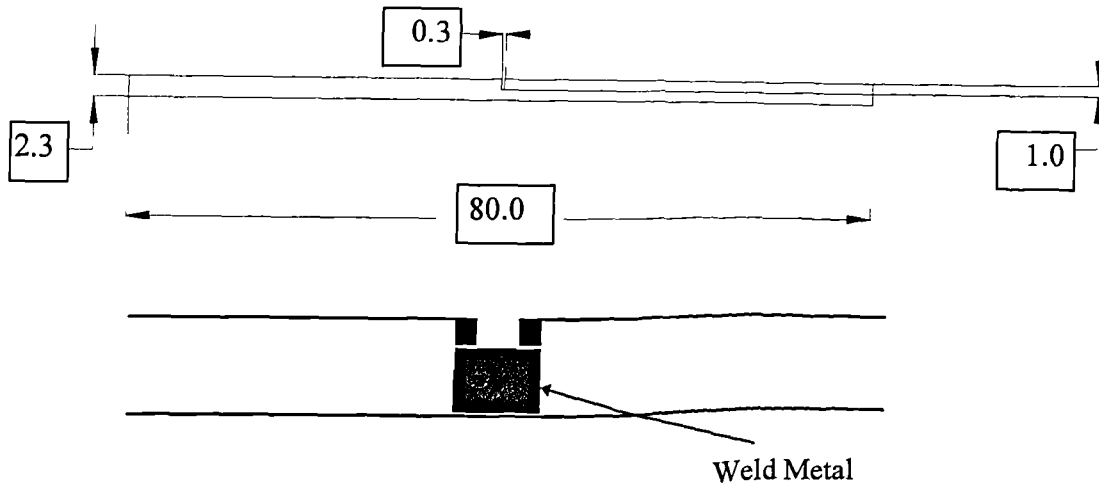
Dimensions (in mm) of welded specimens in the CTOD test.
